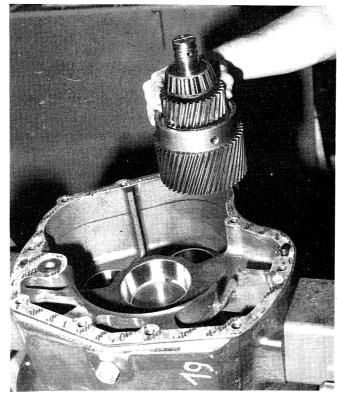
Removing or Installing the Forward Clutch Assembly.
